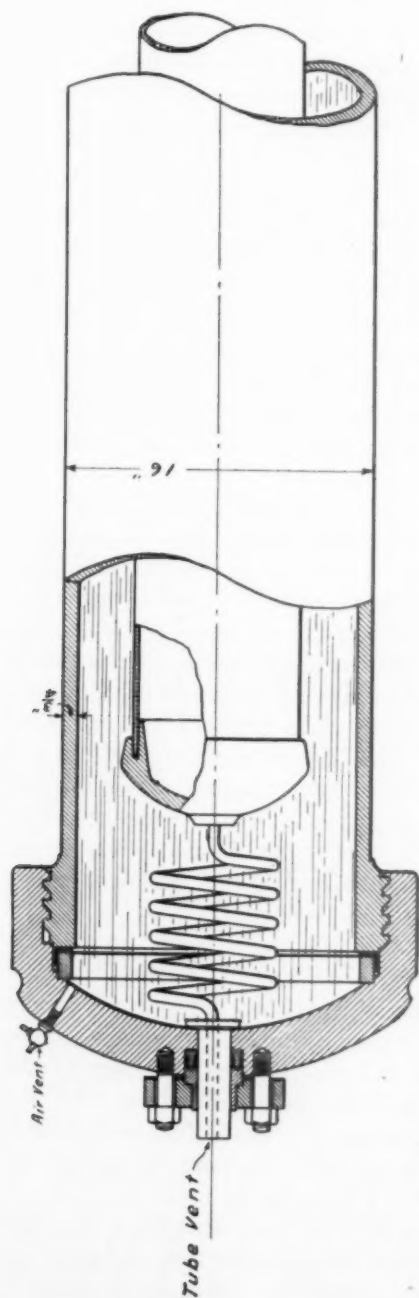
EXPERIMENTAL TUBE WITH PRESS-FITTED TEST HEAD SHOWN IN POSITION IN 16" HYDRAULIC TEST CYLINDER. THIS STYLE OF HEAD IS MARKED "c" IN THE TABULAR STATEMENTS.
